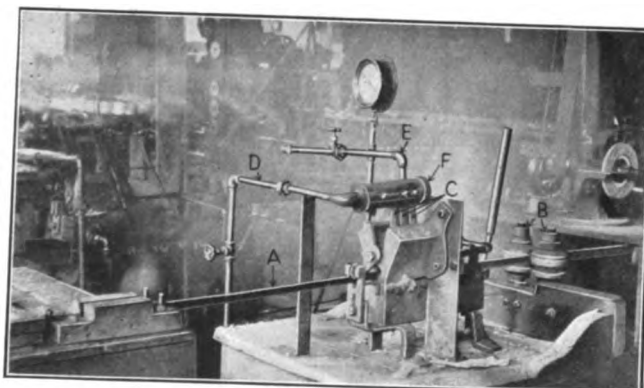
AUTOMATIC TOOTH-HARDENING FURNACE
